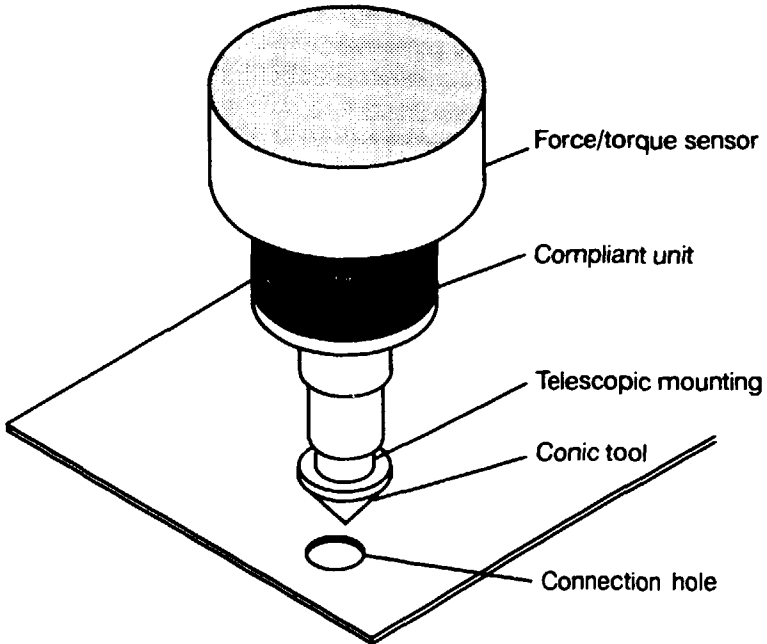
Test setup for the locating of boiler connections holes with a conic tool.
